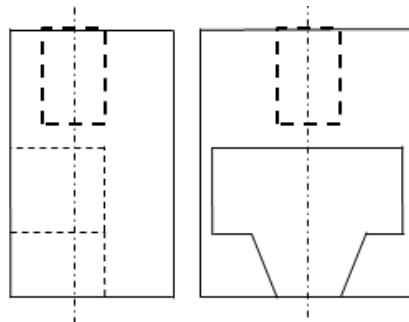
Schematic of creep samples. The gage section is 6 mm by 10 mm by 38 mm long. Tabs are provided for mounting the LVDT cage.
